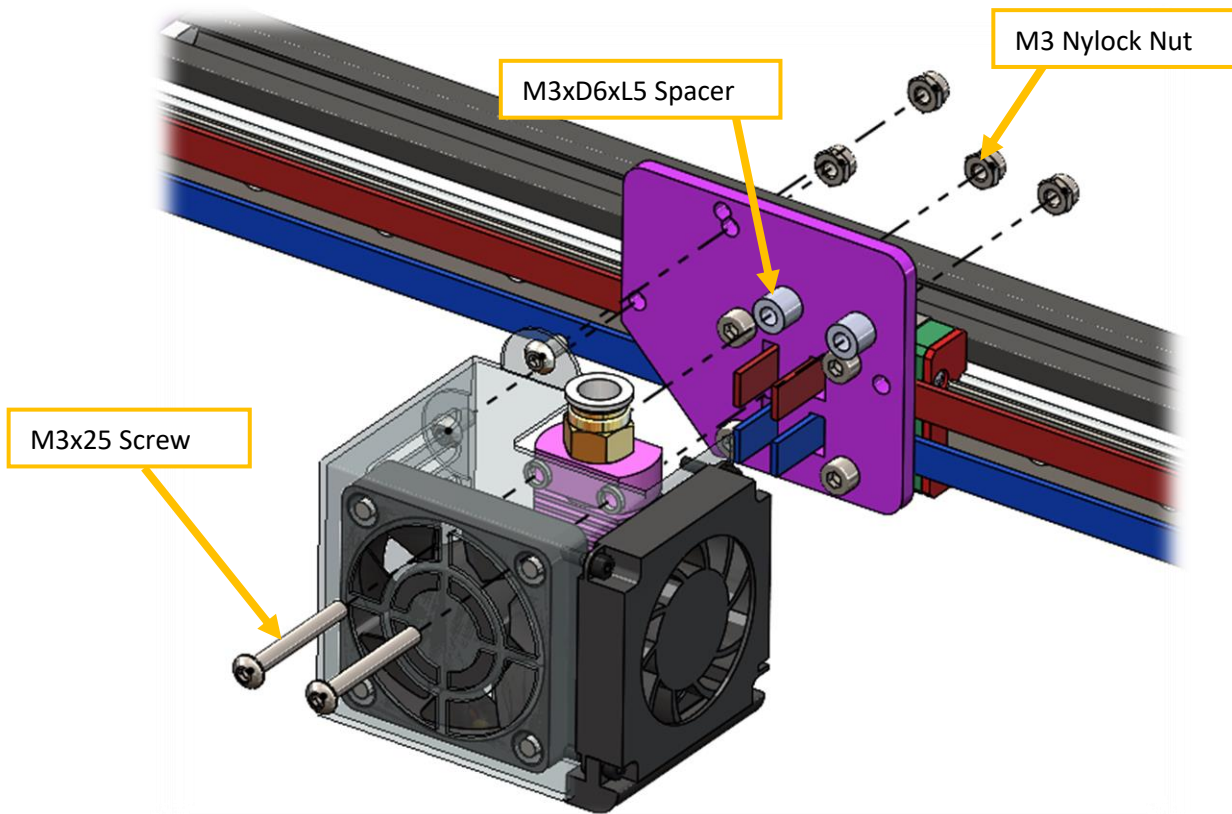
Stock Hotend Ender 3/PRO mounting scheme
